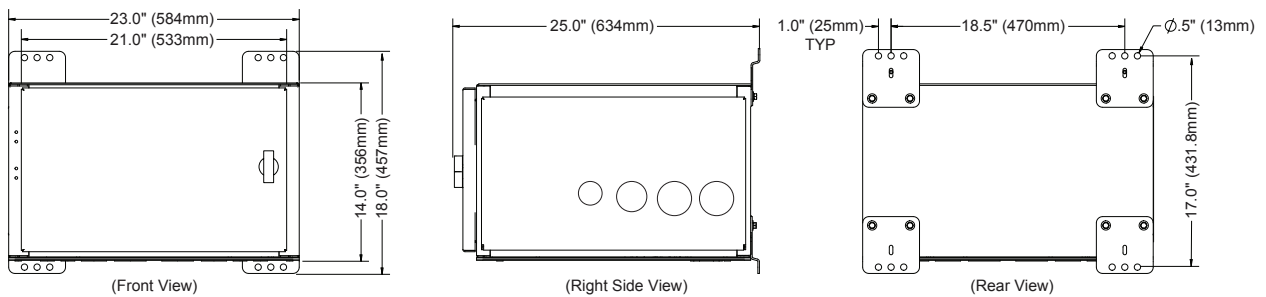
, FBE2322-AEE/BEE Auxiliary Equipment/Battery Expansion Enclosure Exterior Dimensions
